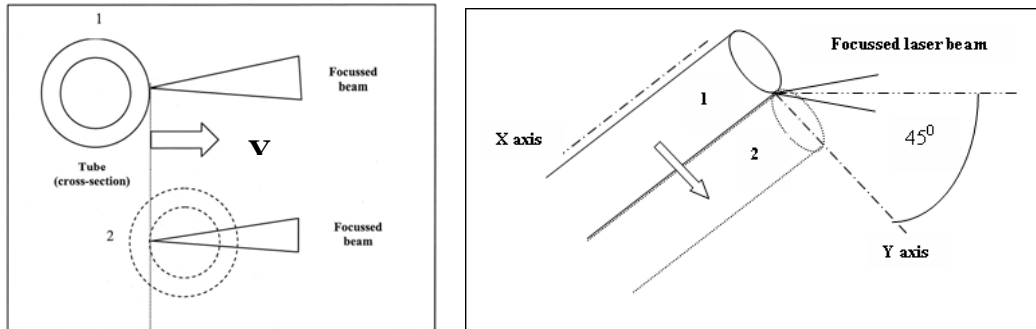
Relative position of the tube surfaces wrt the focused beam during laser cleaning, position 1 – during outer surface cleaning, position 2 – during inner surface cleaning. (a) Side view, (b) isometric view.(source: A. Kumar)
